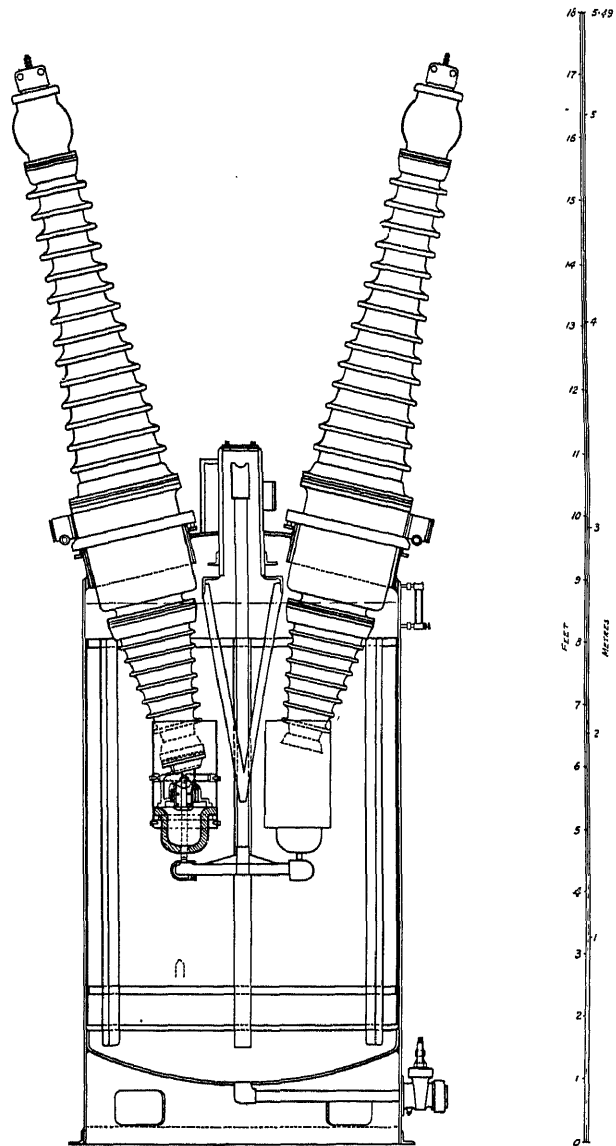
Cross section outdoor type circuit breaker for 132 kV and 1500 000 kVA breaking capacity.—Two breaks per phase. Explosion pot of moulded insulation to withstand hydraulic test pressure of 1000 lbs./sq.in. (70 kg/cm²)—Welded steel tank and top plate to withstand hydraulic test pressure of 200 lbs./sq.in. (14 kg/cm²)—Oil filled bushings. This circuit breaker is shown with the top plate welded to the tank. Other examples of the same breaker are built with the top plate bolted to the tank.
